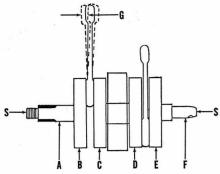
Refer to text to check crankshaft for correct assembly or wear.
